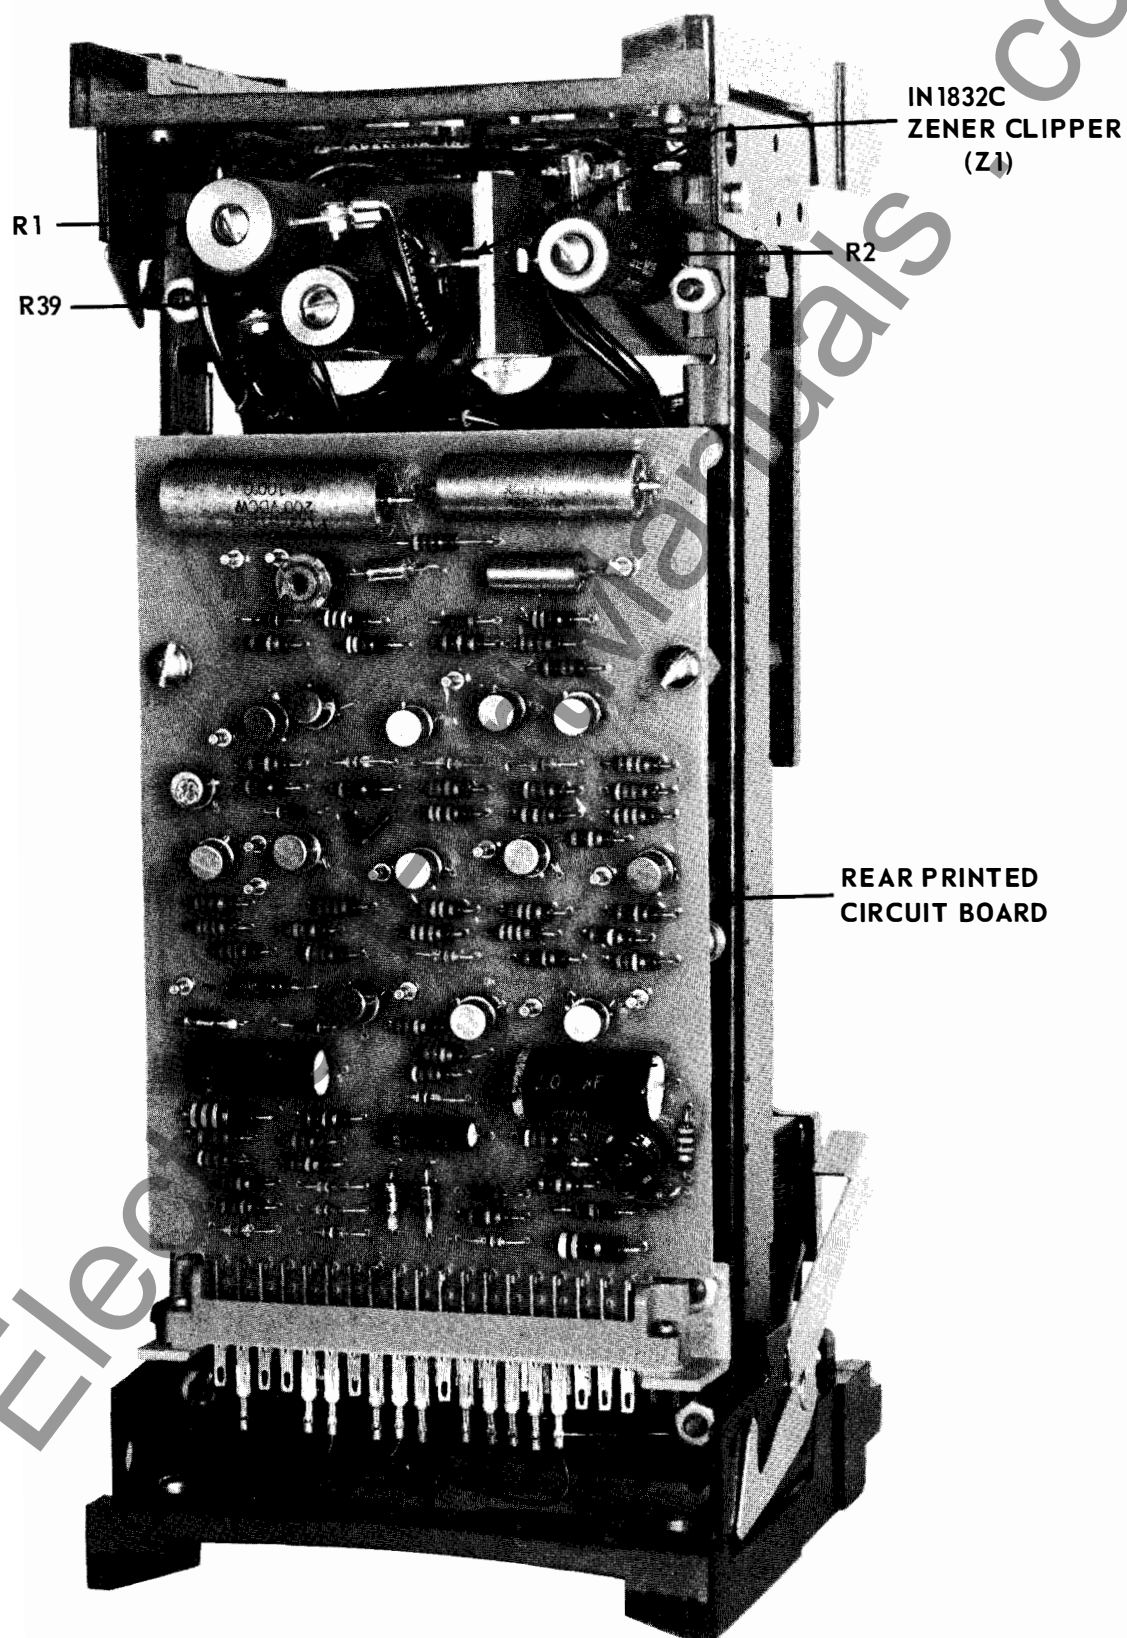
Type SKA Carrier Auxiliary Relay in FT32 Case (Rear View).
